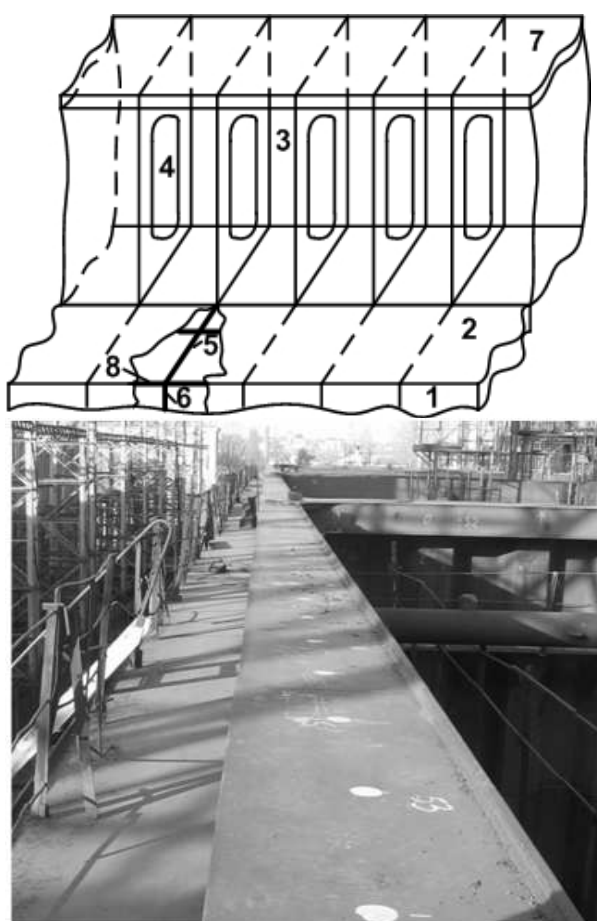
Hatch coaming: 1 – ship's side (sheer-strake), 2 – deck plate, 3 – hatch coaming, 4 – coaming stay, 5 – beam, 6 – frame, 7 – coaming's horizontal plate, 8 – deck stringer
